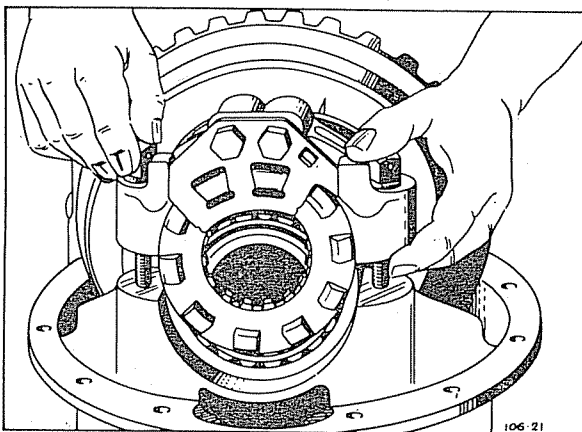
Removing or Installing Bearing Cap, Adjuster and Lock Assembly.
